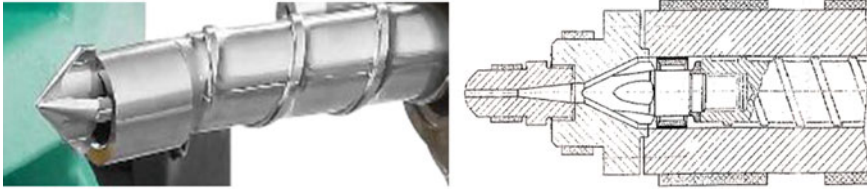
Screw and non-return valve (Reproduced from Arburg)
